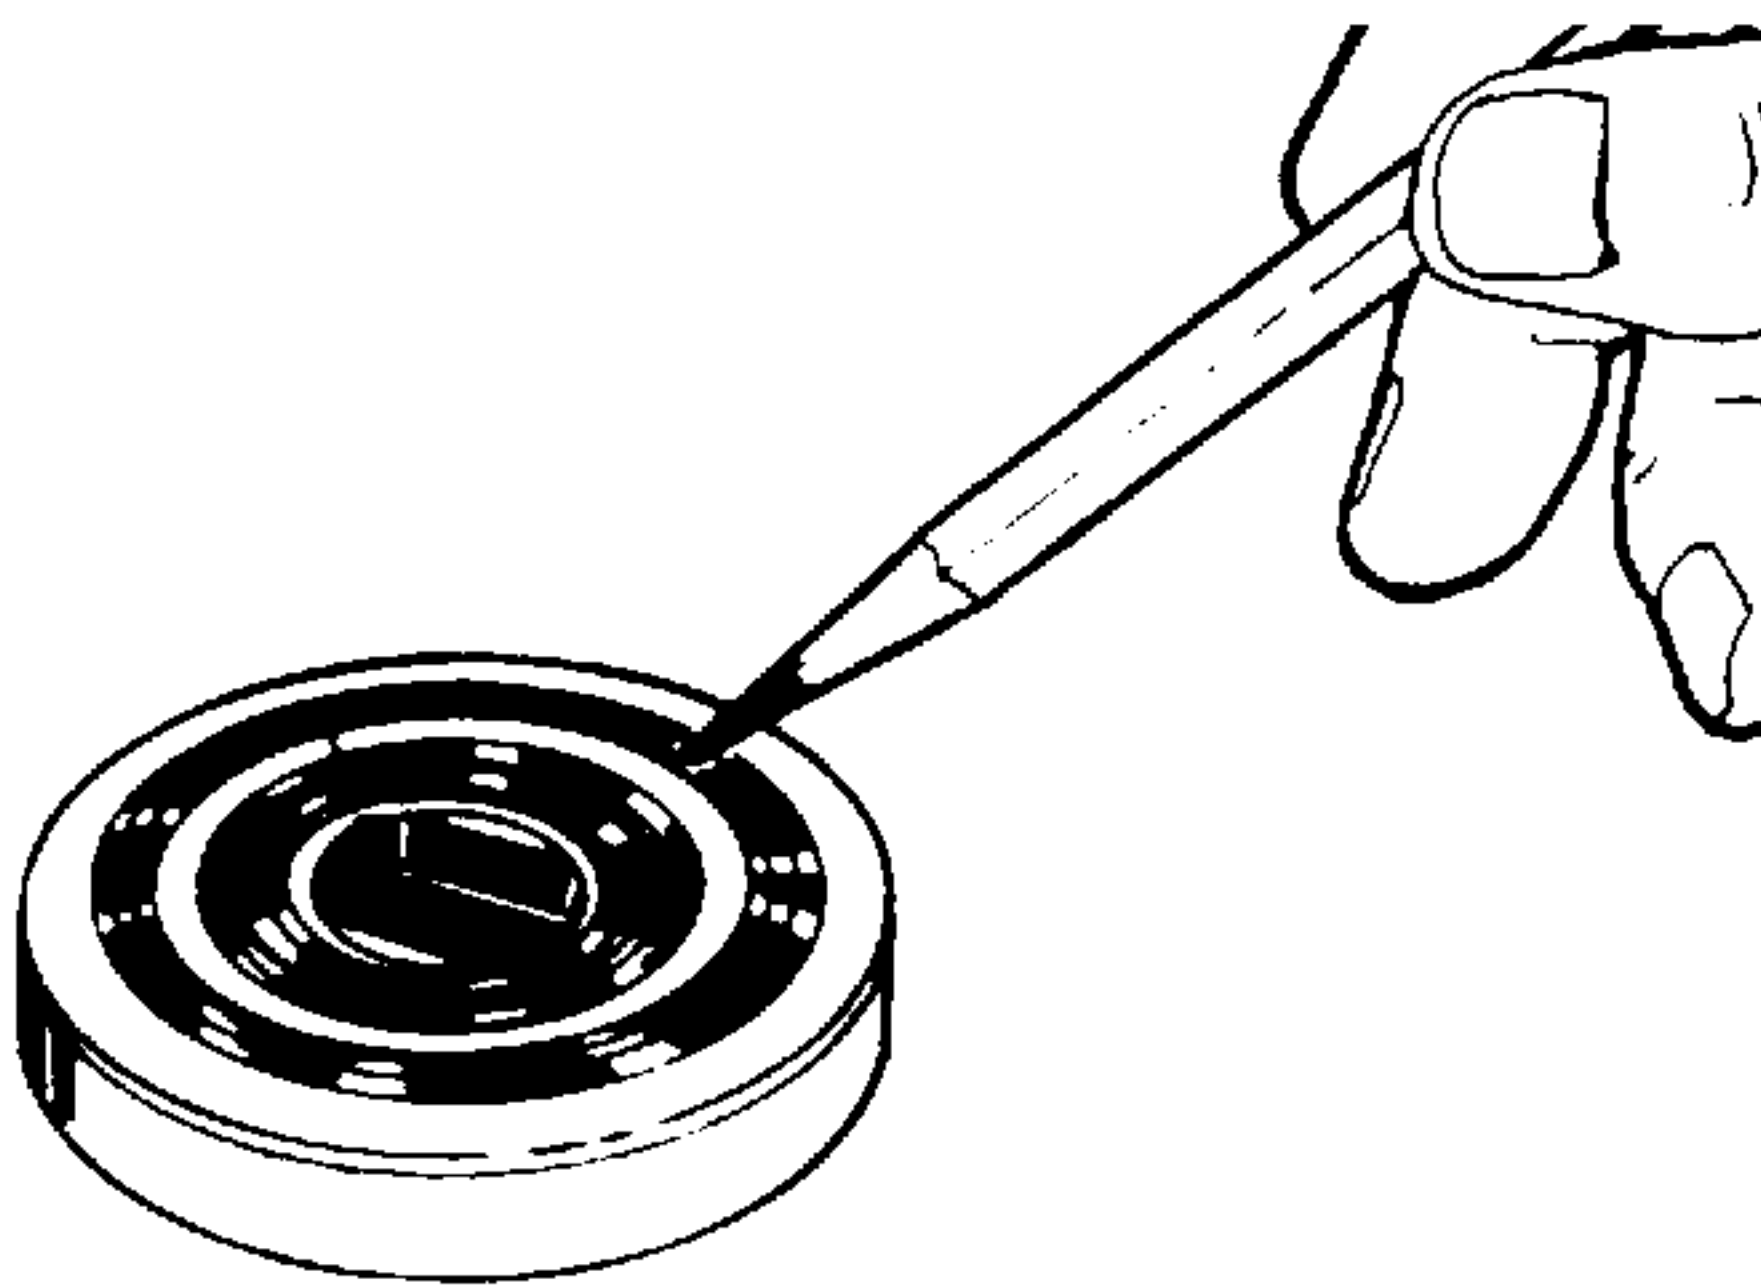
Inspecting the Thrust Bearing Side of the Drive Plate.
